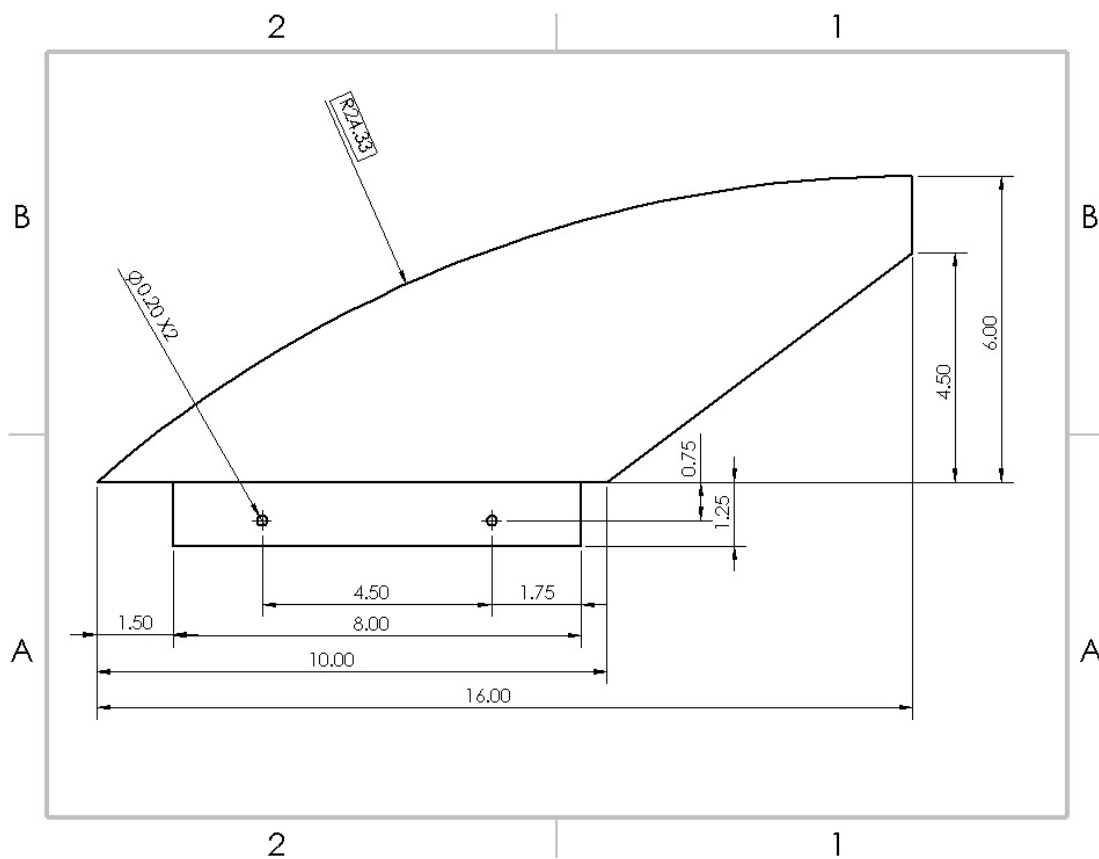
Dimensioned drawing of the geometry of the ogive fin. Root chord is 10 in. and the fins will span 6 in. out of the launch vehicle.
